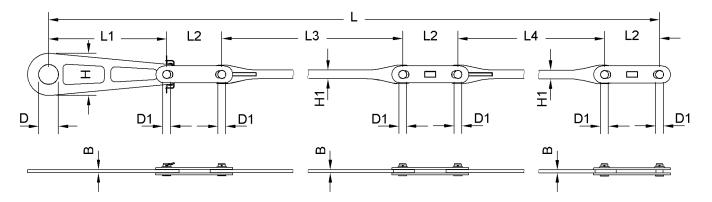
Dimensions of jib pendant strap (A-frame 2 to 1507 jib head section)
